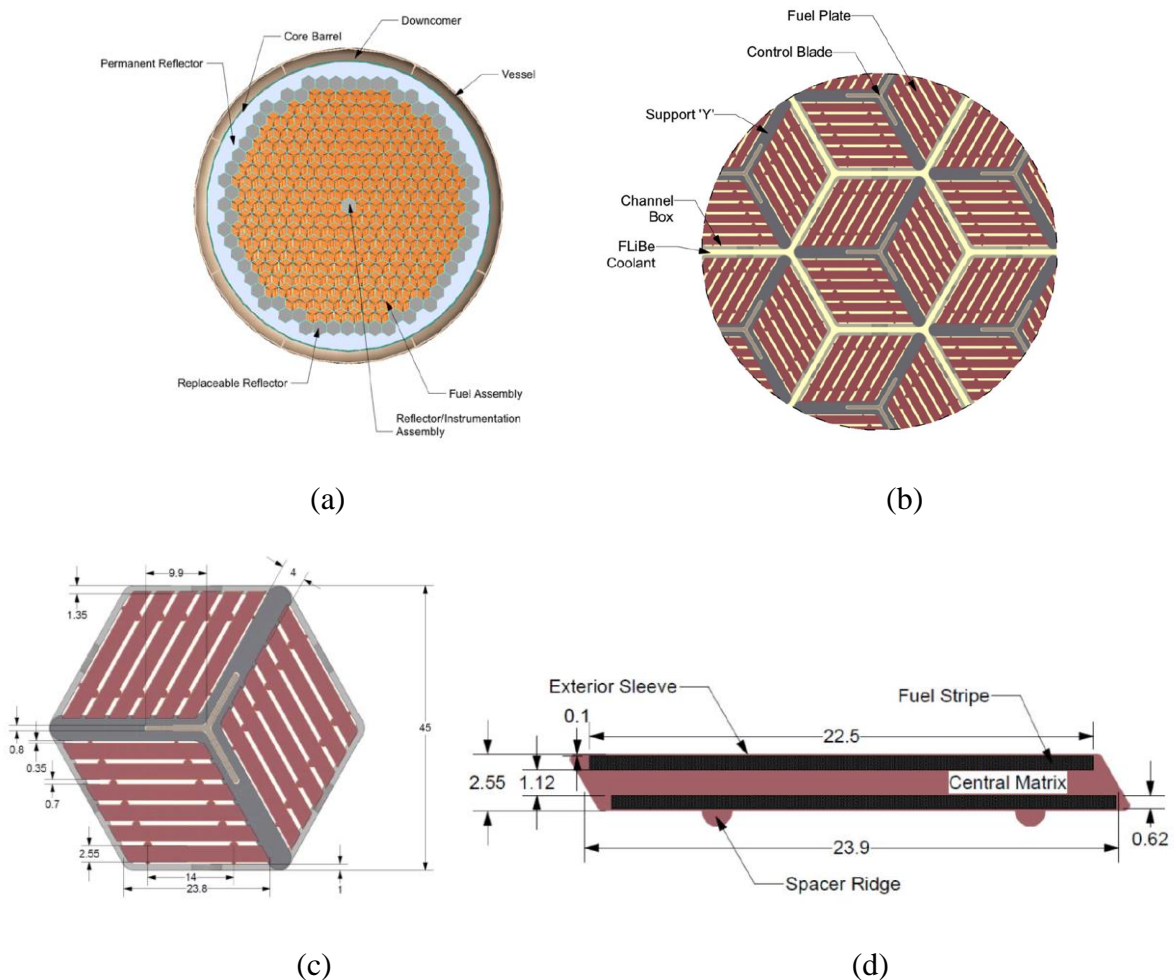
Cross-sectional view of (a) reactor vessel, (b) a group of fuel assemblies, (3) fuel assembly with dimensions, and (4) a fuel plate (unit: cm)
